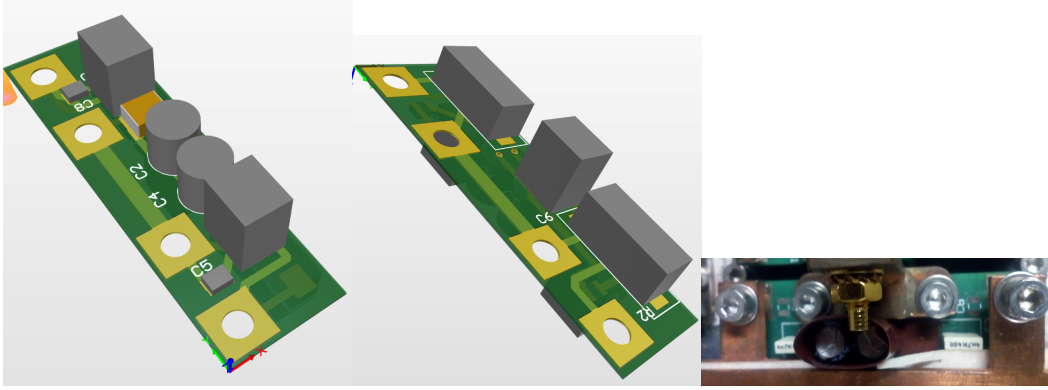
Designed snubber circuit PCB model(in 3d) and fabricated prototype
